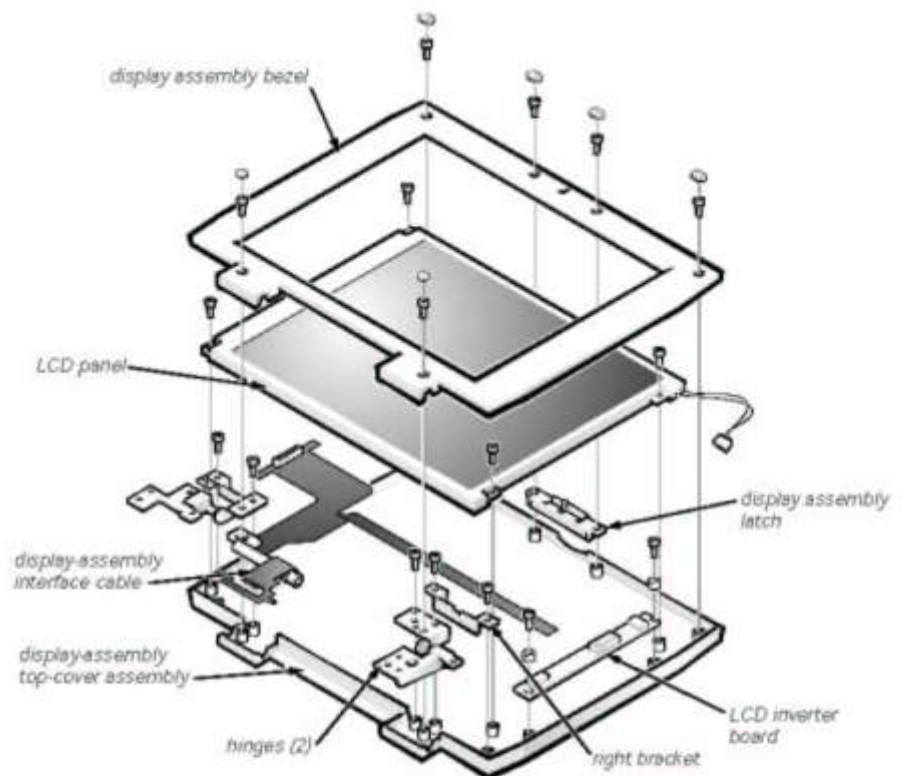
Exploded View—Display Assembly (12.1-Inch Display Shown)
